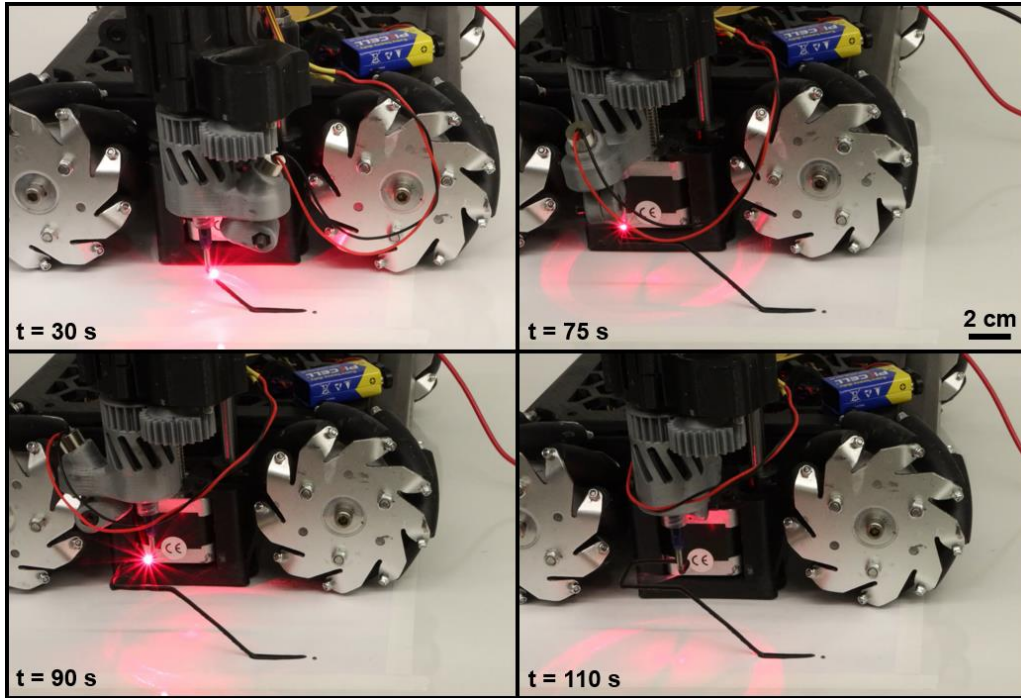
Free form print showcasing laser rotation to allow for omnidirectional printing.
